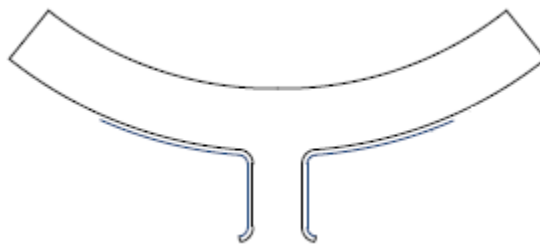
Flexure-Pivot Tilting-Pad Journal Bearing [15]
